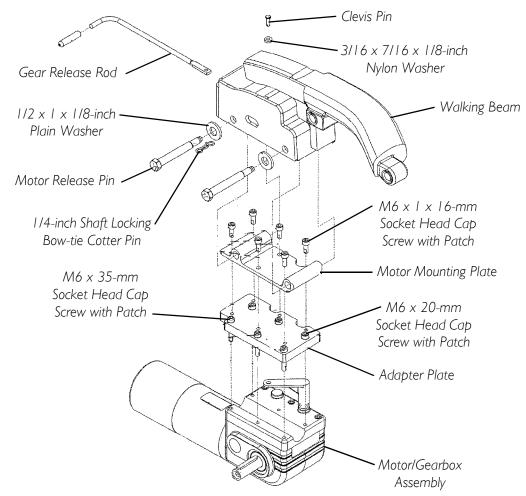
REMOVING THE 2-POLE MOTOR/GEARBOX ASSEMBLY
